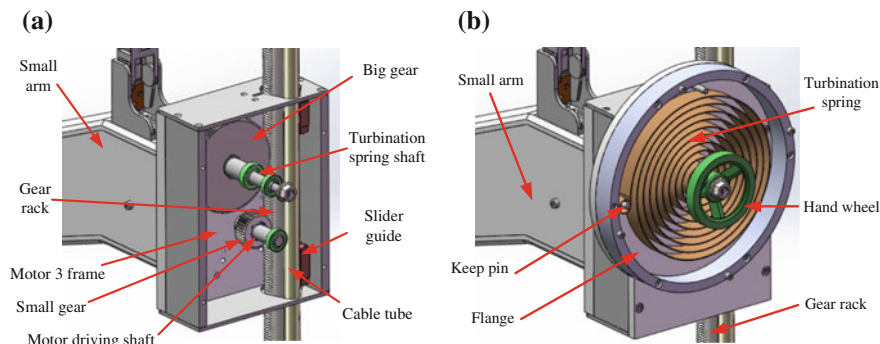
Views of the structure of the gravity balance mechanism: a the gear box; b the turbination spring box
